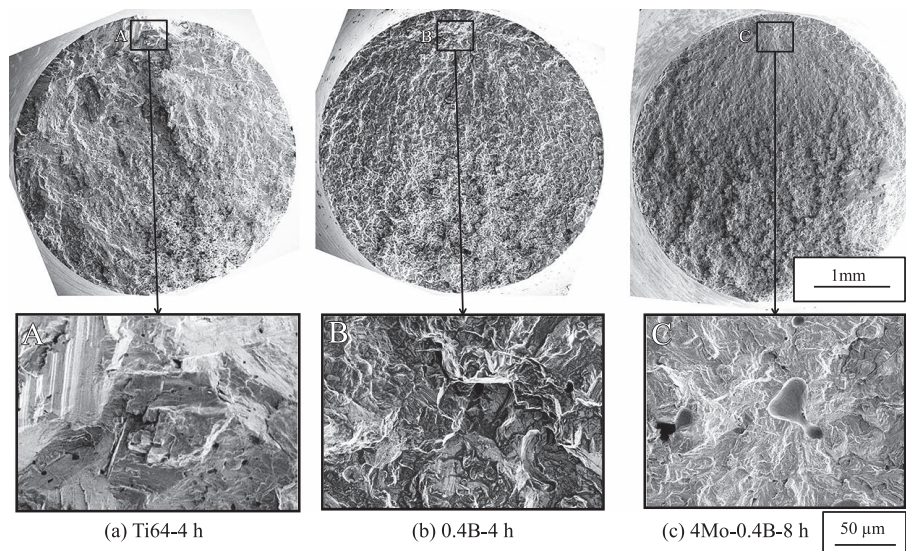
Fractographies of Ti64 compact sintered for 14.4 ks (a), 0.4B compact sintered for 14.4 ks (b) and 4Mo-0.4B compact sintered for 28.8 ks (c). The Ti64 compact was failure by 294 MPa at 6.0×10^6 cycles. The 0.4B compact was failure by 457 MPa at 4.5×10^6 cycles. The 4Mo-0.4B compact was failure by 439 MPa at 3.8×10^6 cycles.
